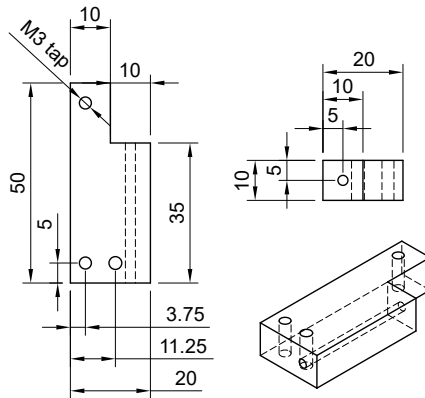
Technical drawing and dimensions of clamping block for outer flexures
